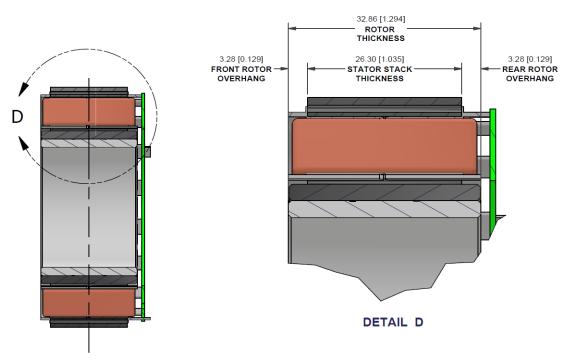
Detail view of Rotor to Stator Alignment on Sensor-less Motor version
